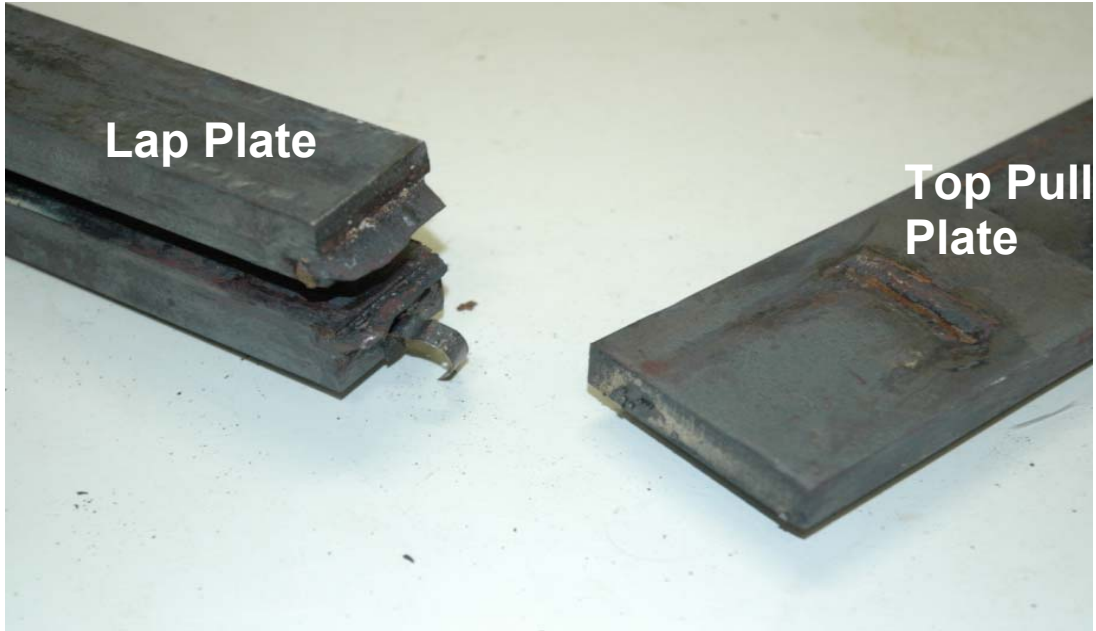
Photograph of Specimen 9 after fracture, where the weld on the lap plate and top base plate is visible
